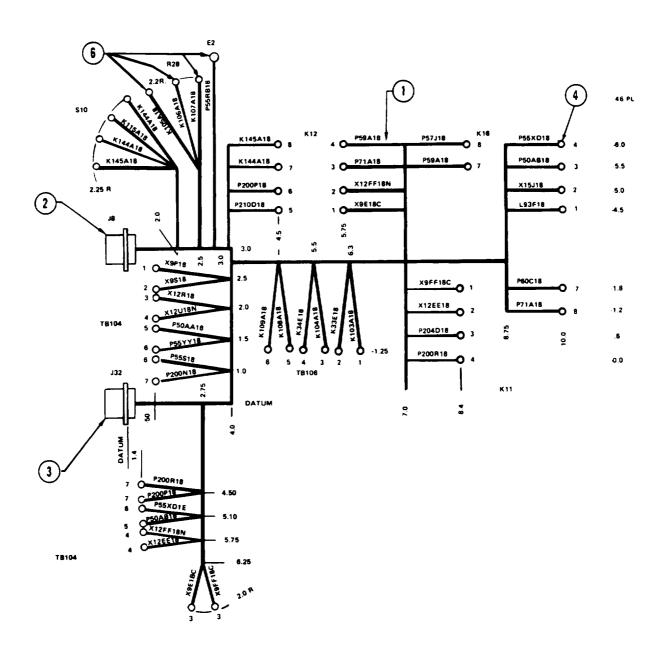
50/60 Hz Precise Relay Assembly Wiring Harness, Drawing No. 72-2242 (Sheet 2 of 2)
